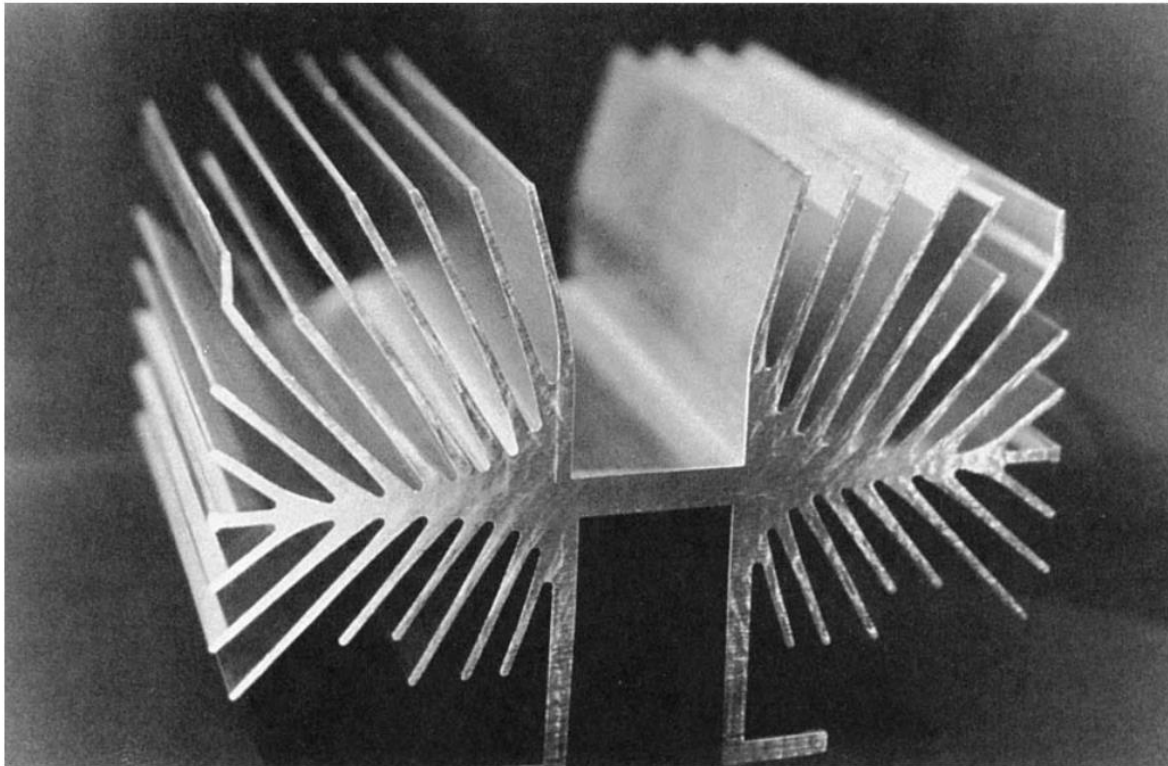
A complex extruded cross section for a heat sink. (Photo courtesy of Aluminum Company of America, Pittsburg, Pennsylvania.)
